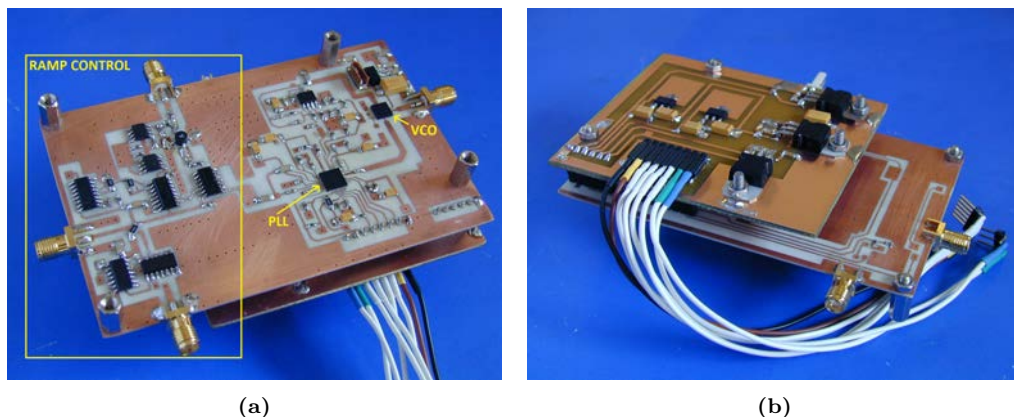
PLL-based signal generation board. (a) Top side of the board. (b) Bottom side of the board.
